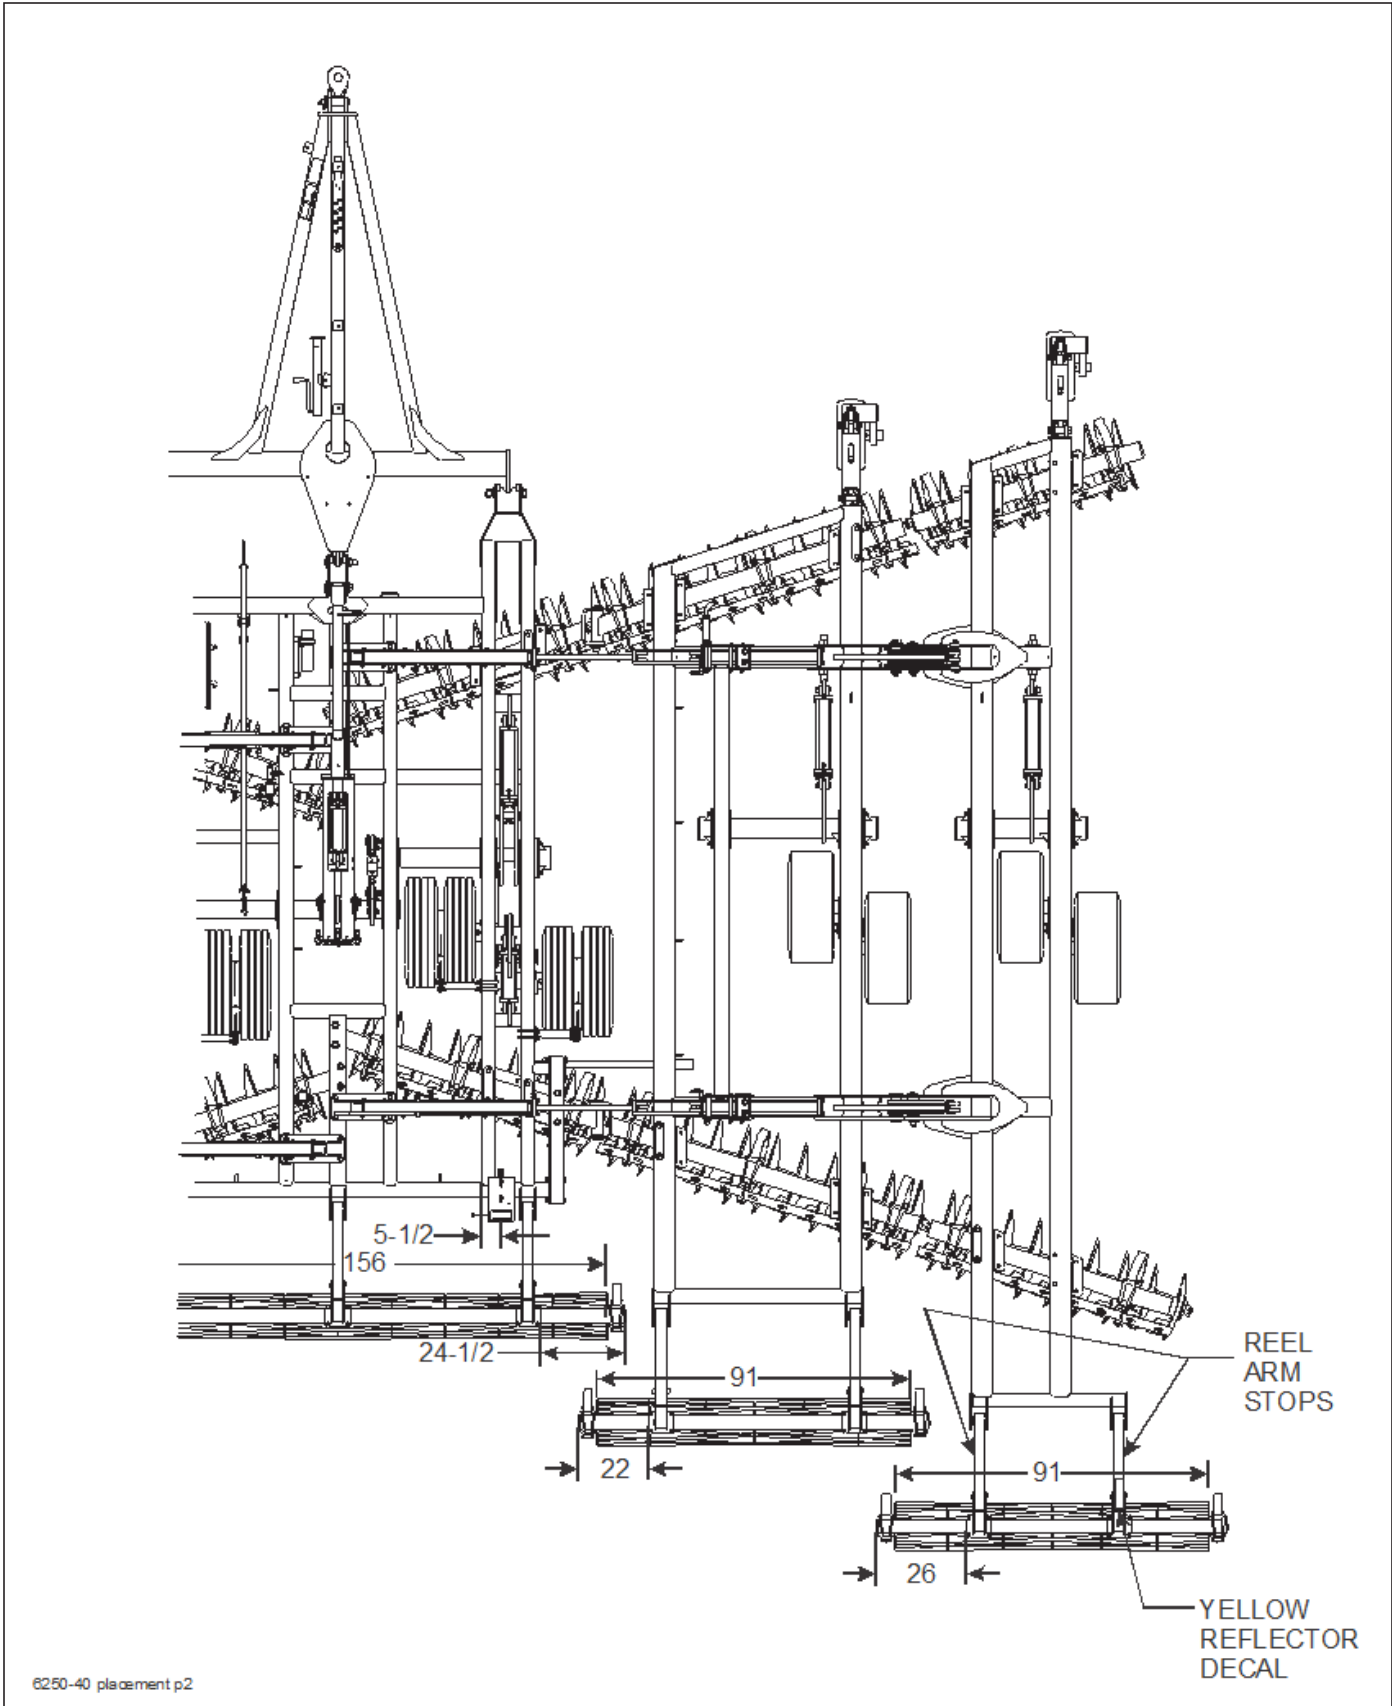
Wing Stabilizer and Light Bracket Placement (40' Model)
